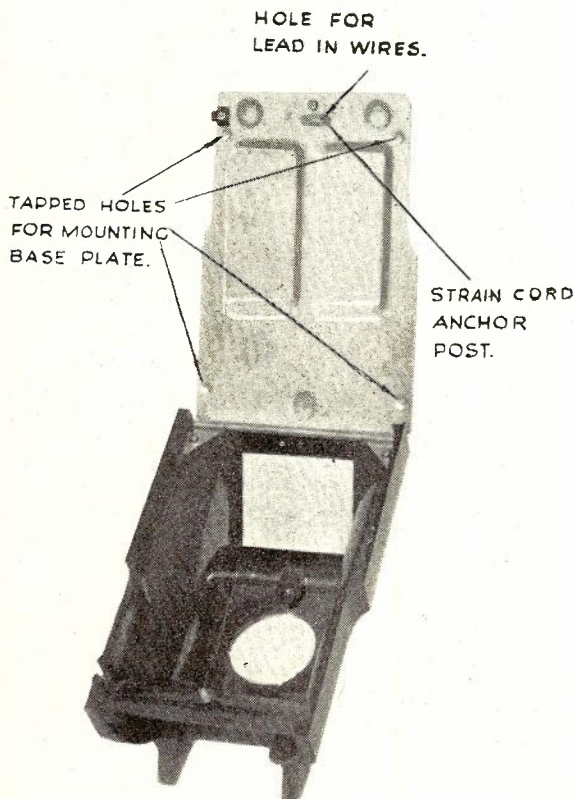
Wall Case Moulding and Back Plate Before Component Parts are Fitted.
